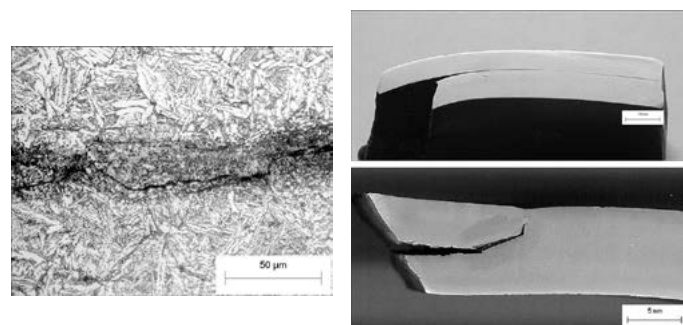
a: Delamination of pipe wall in the HAZ;
